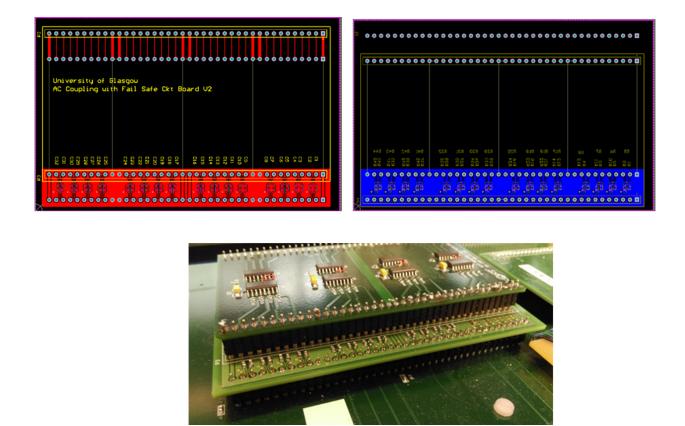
AC coupling Board. Top left - Top layer, Top right - Bottom layer, Bottom - Assembled PCB as a mezzanine card between the HSIO and the driver-receiver board.
